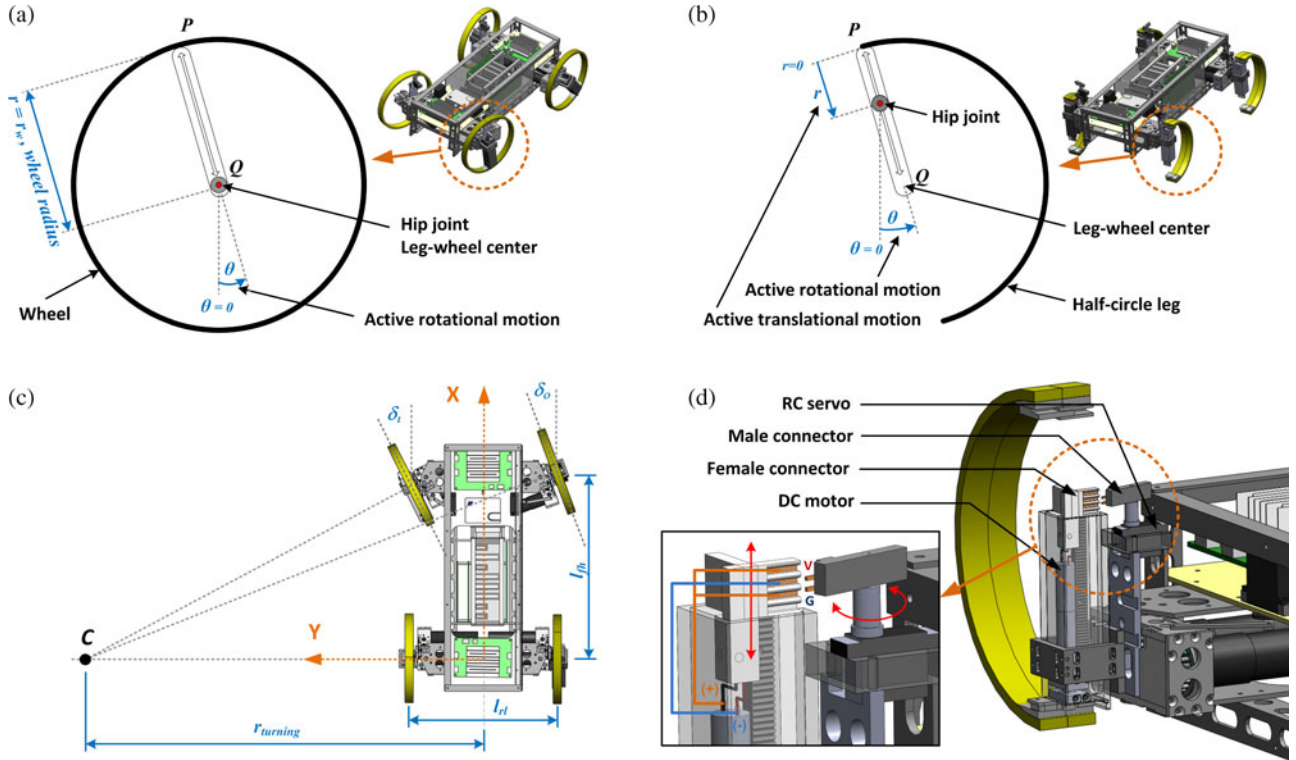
Drawings of the robot: (a) detailed geometric illustration of the wheel, (b) detailed geometric illustration of the leg, (c) the Ackermann steering geometry, and (d) leg-wheel switching mechanism.
